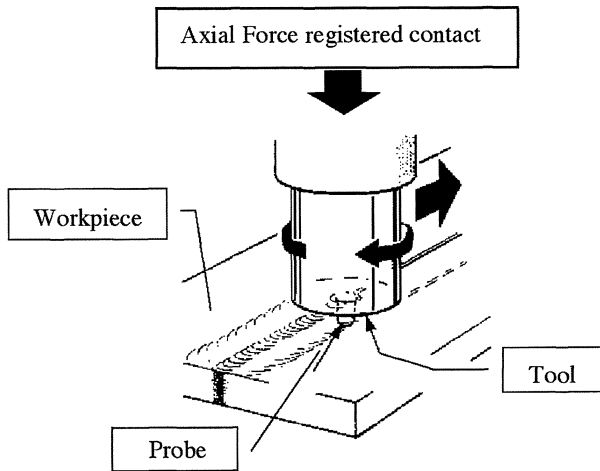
Schematic illustration of the friction stir welding principle.
